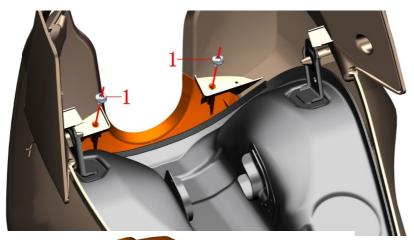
FUEL TANK COVER		Fuel tank middle cover assembly	CHK	Q
